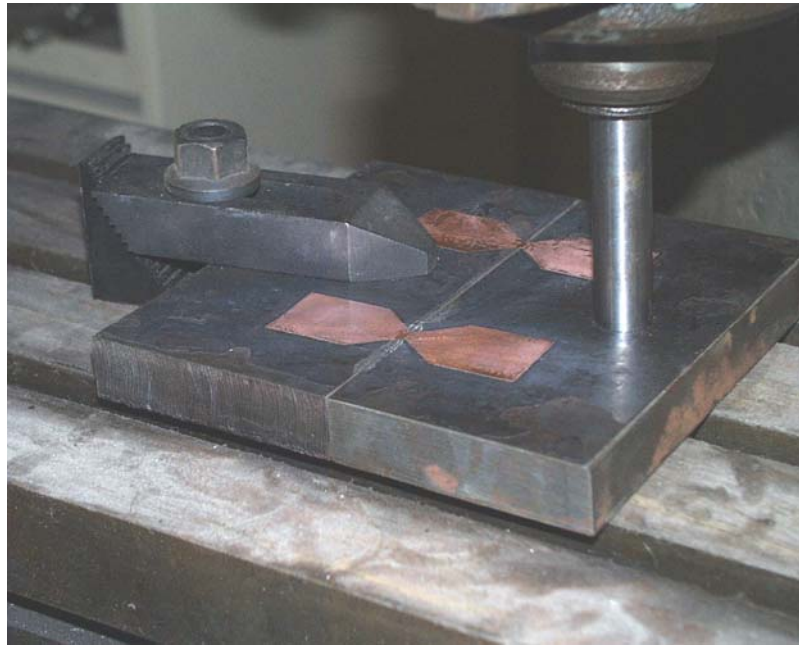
Bow-tie Specimens in One-Dimensional Test
